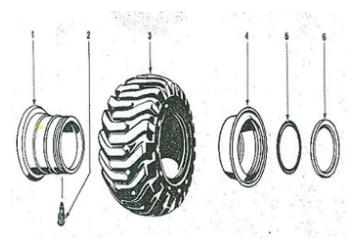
Components of the multi-piece rim wheel: 1. rim base, 2, valve assembly, 3.tire, 4. side ring, 5. O ring, and 6. lock ring (figure courtesy of OSHA).
